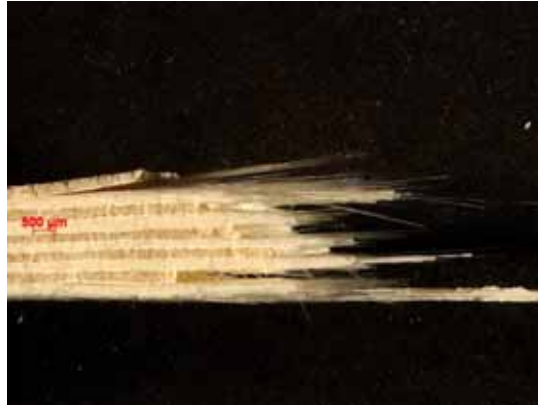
Fracture surface of the N610/LaPO₄/Al₂O₃ specimen with 10ply 0°/90° uni-tape lay-up subjected tension to failure in laboratory air at 1100 °C.
